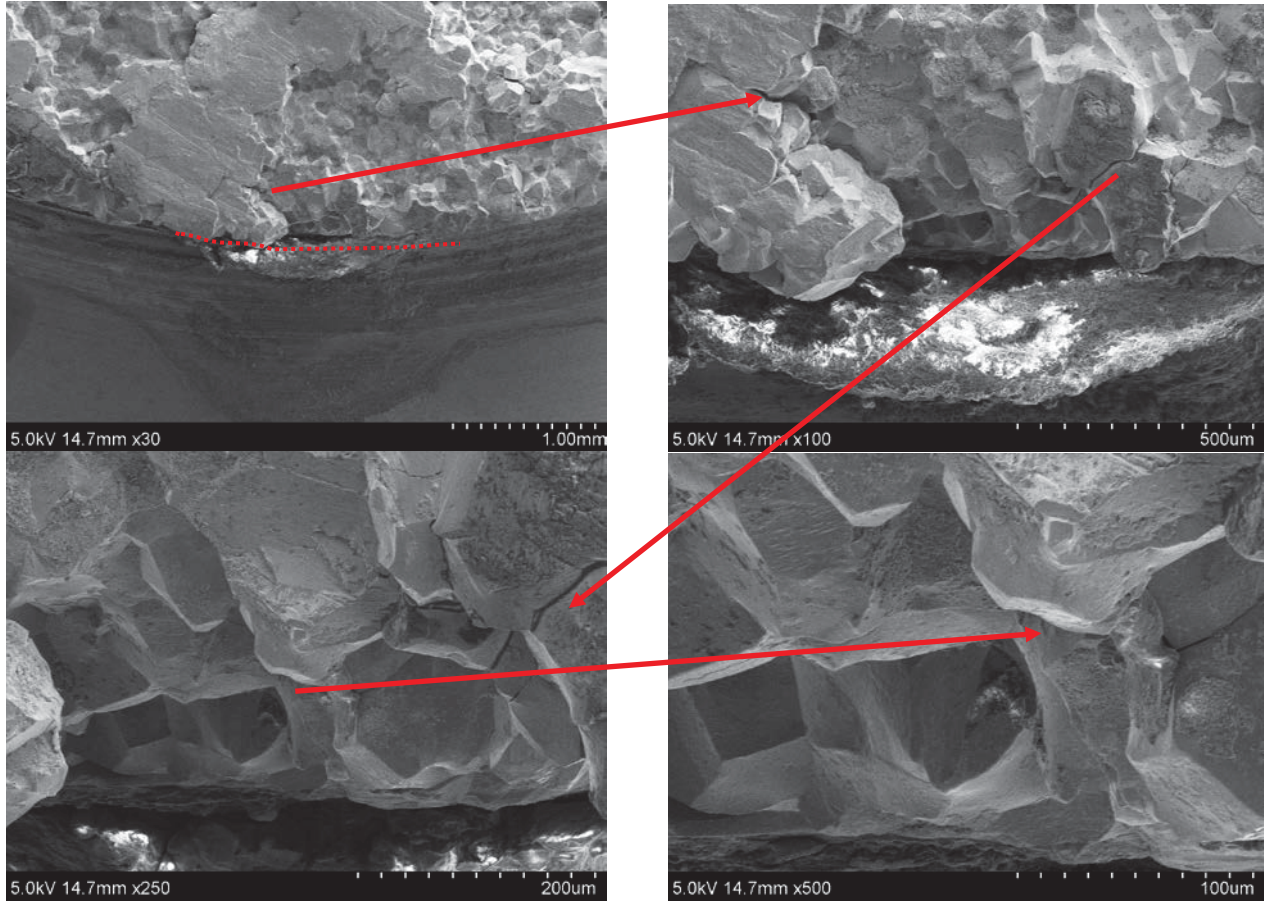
FF1, Specimen II, 180° Position shows intergranular cracking.
